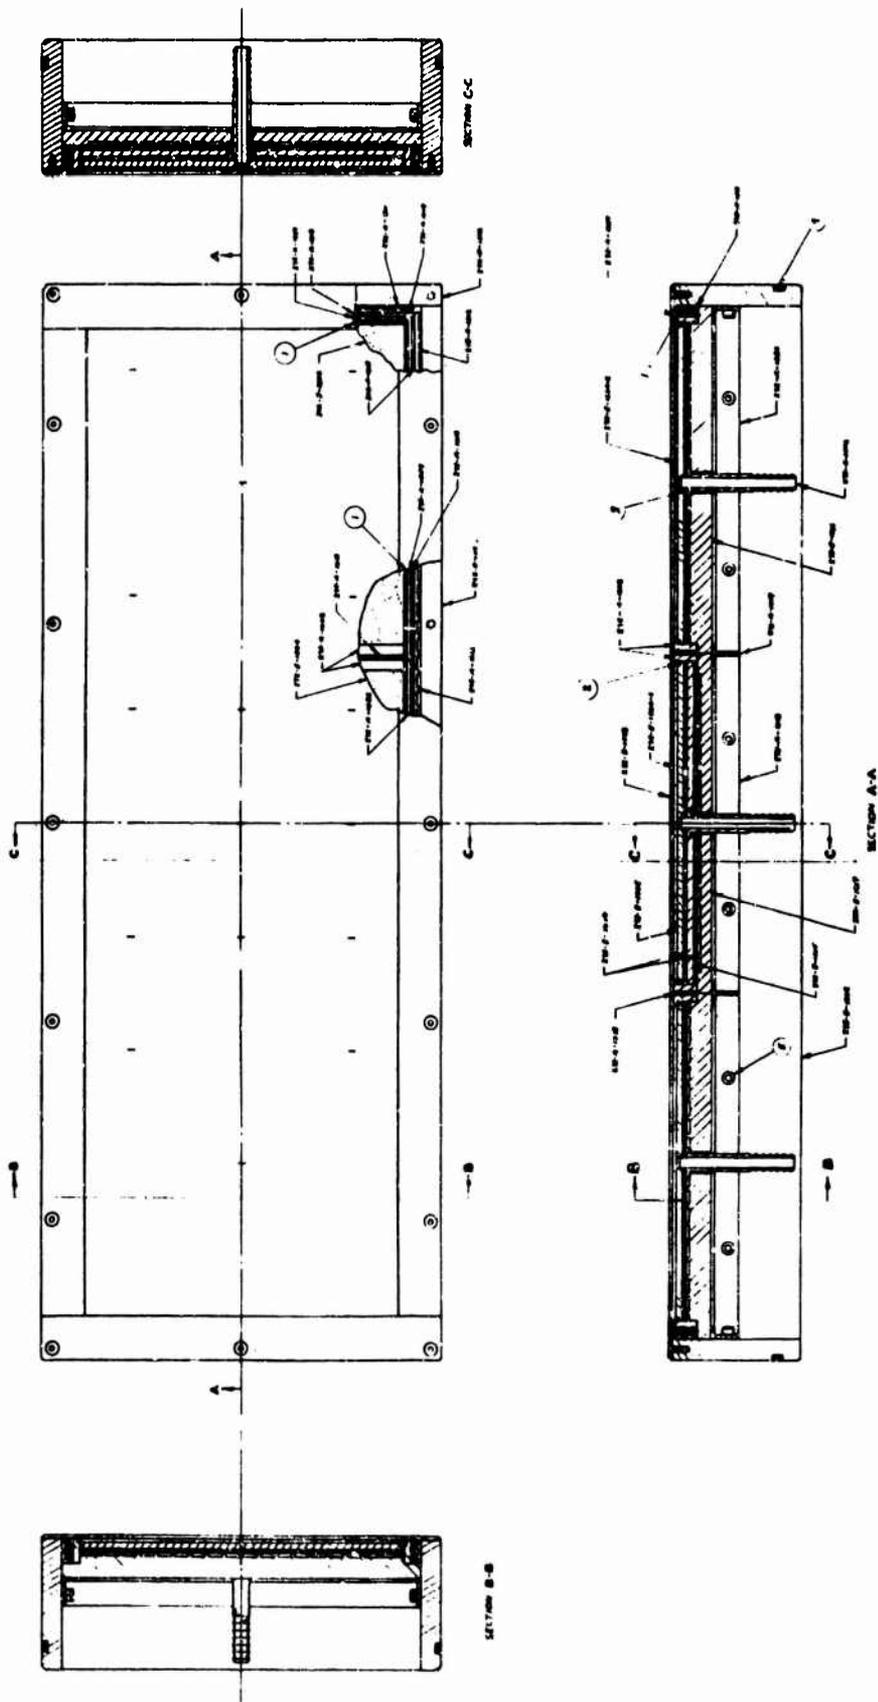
SKIN SIMULATOR MODEL ASSEMBLY DRAWING
